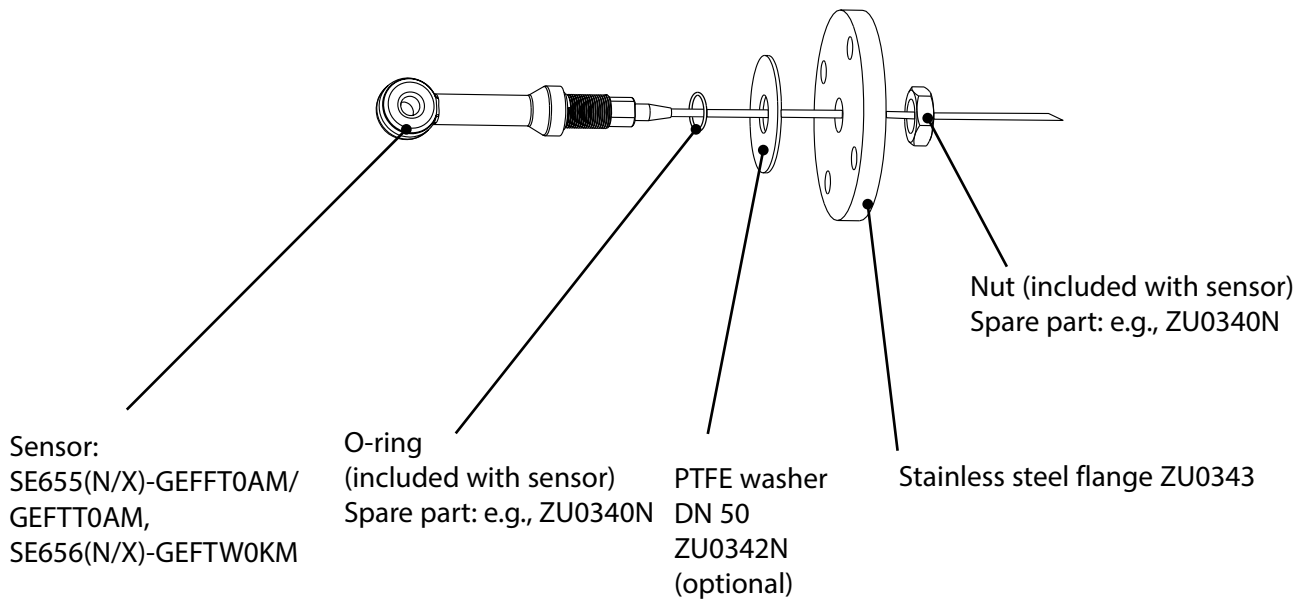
Assembly with stainless steel DN 50 flange, with PTFE washer
